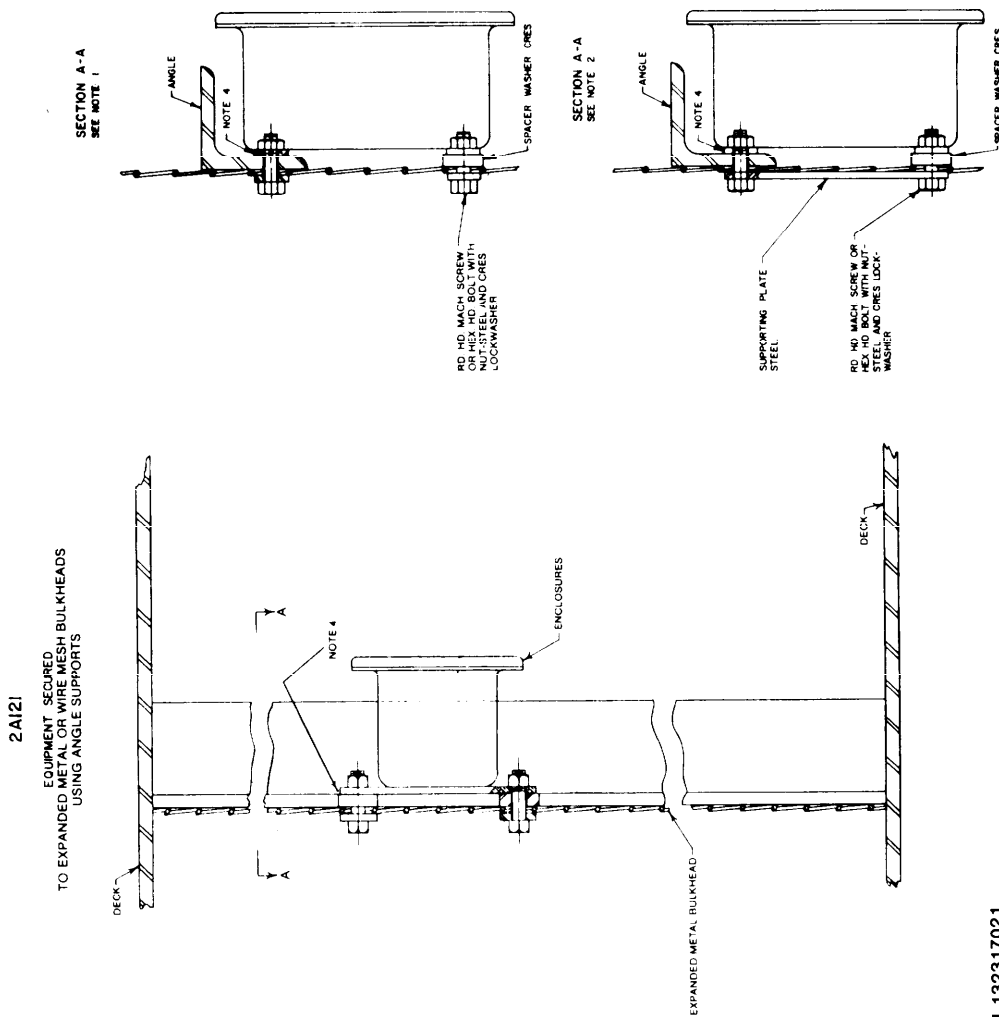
A12. Equipment mounted on expanded metal or wire mesh bulkheads.
